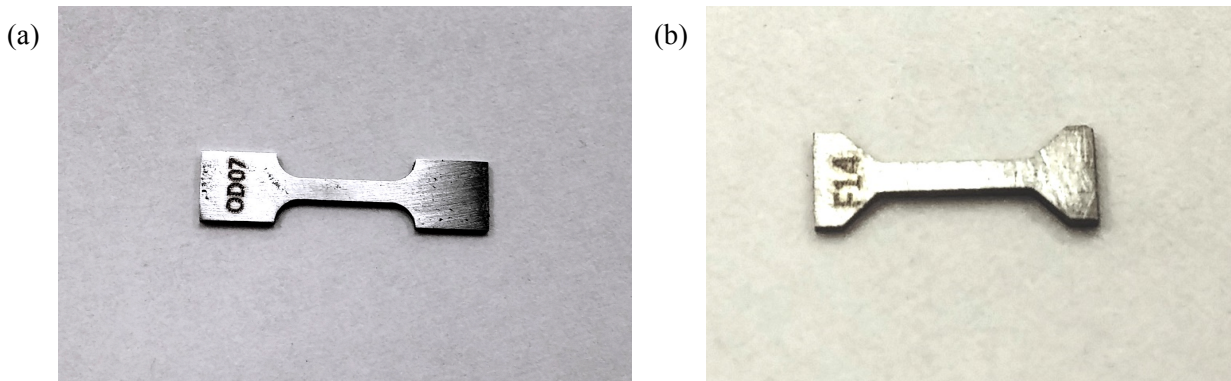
Image of laser engraving positions on sample specimens; (a) position on SS-J2 sample and (b) position on SS-2E sample.
